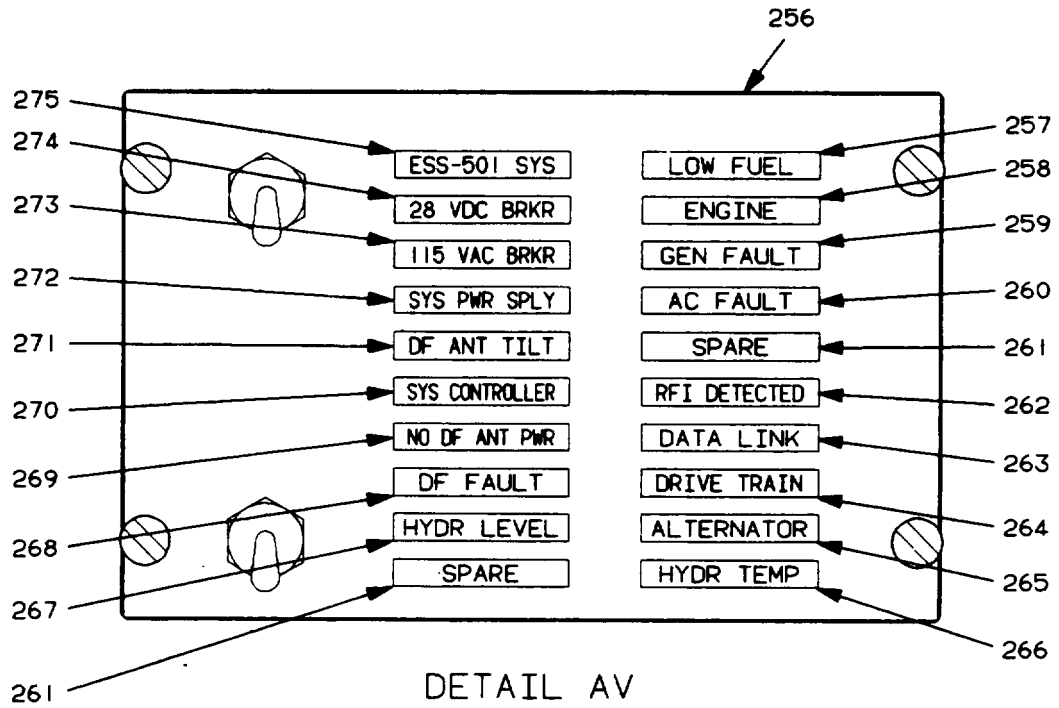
SHELTER ASSEMBLY (SHEET 22 OF 24)
